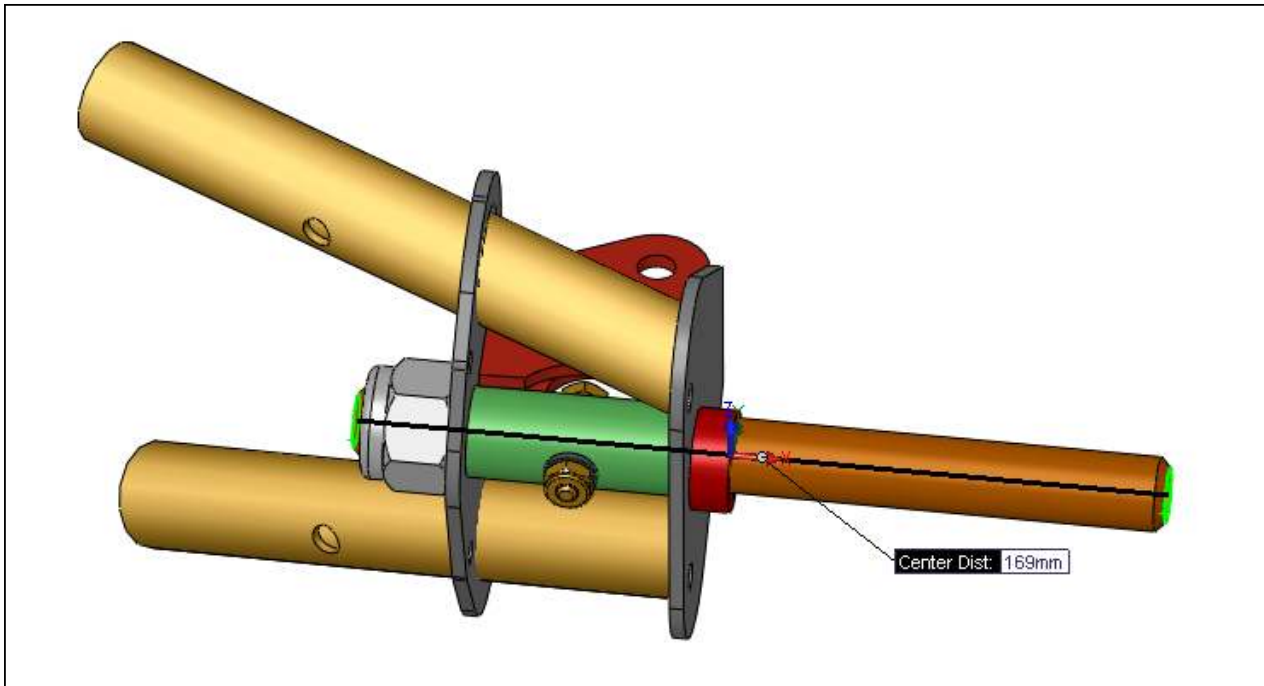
Type 1 axle image (From 5422). To be replaced by 104938 - HUB AXLE EDGE XT TYPE 1
